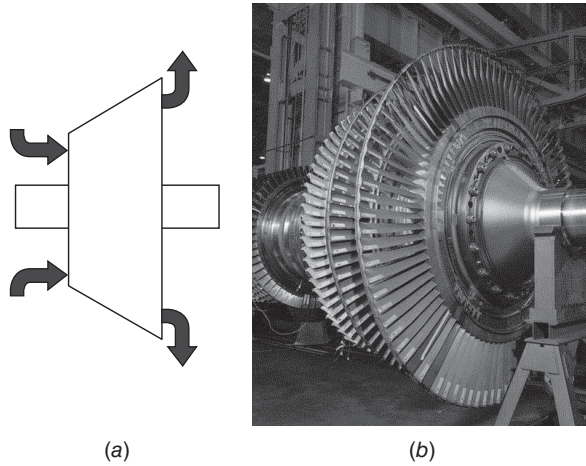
Turbine diagram and photograph of an axial-flow turbine during assembly. Courtesy of General Electric Company.
